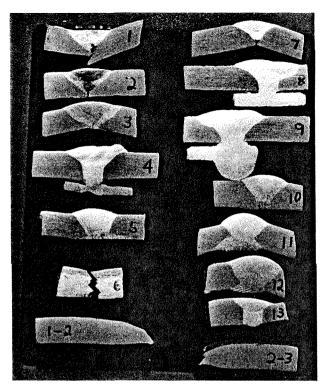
Macrosections of 8-in. n/b 3/8-in. wall aluminium tube welds in original plant.
